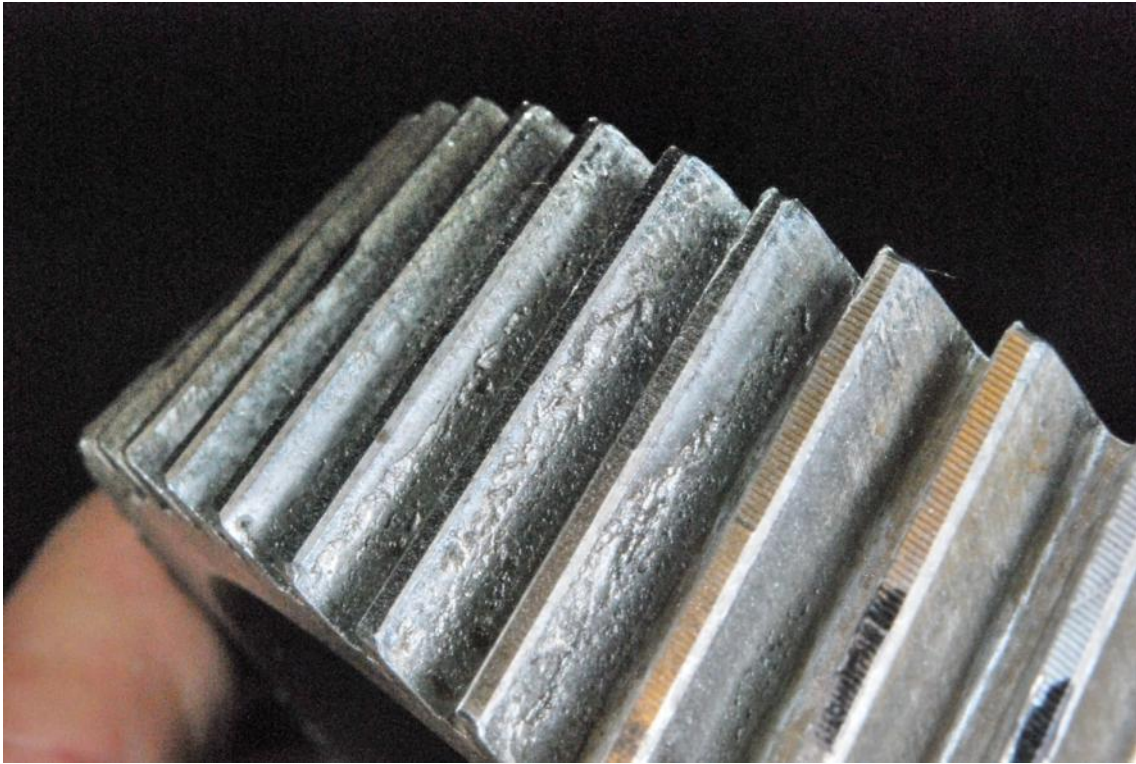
Silver Wing - On the driving side of the camshaft timing gear teeth, severe plastic yielding (peening / rolling) damage is present along with pitting and spalling.
